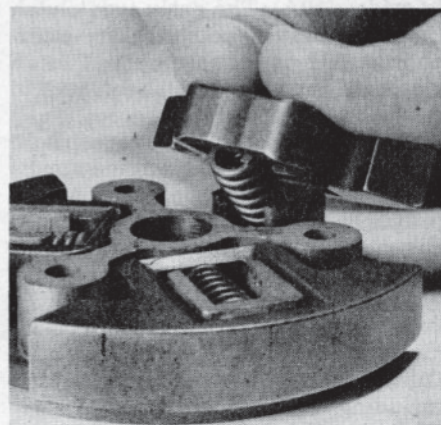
View showing easy method for installing late type clutch shoes and springs on clutch plate.
